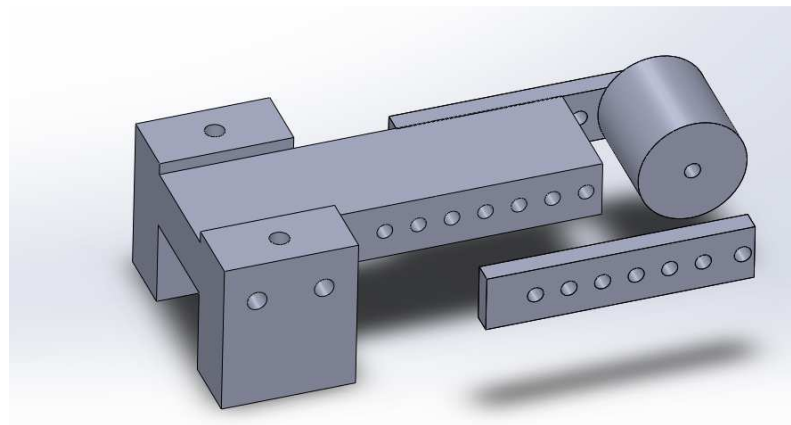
12: A 3D drawing of the adjustable belt tensioner.
